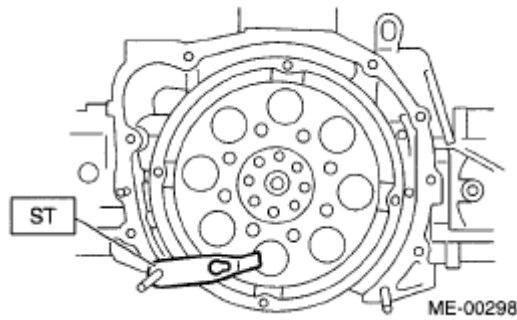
Locking Crankshaft Using Crankshaft Stopper ST498497100 - AT Model
